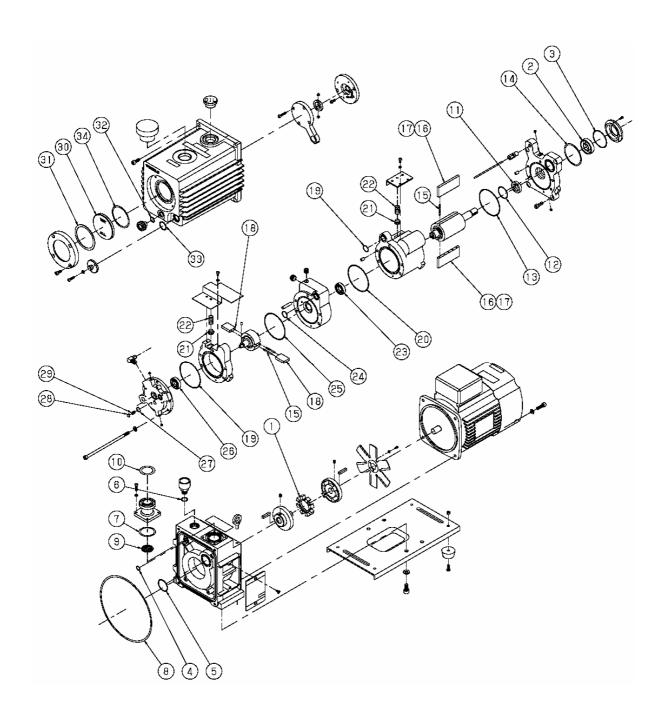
Disassembly drawing of GLD-136A/201A oil sealed rotary vacuum pump
